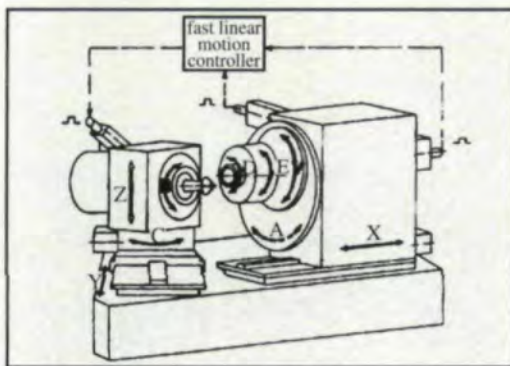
CNC bevel gear generating machine, Klingelnberg KNC 40/60.
